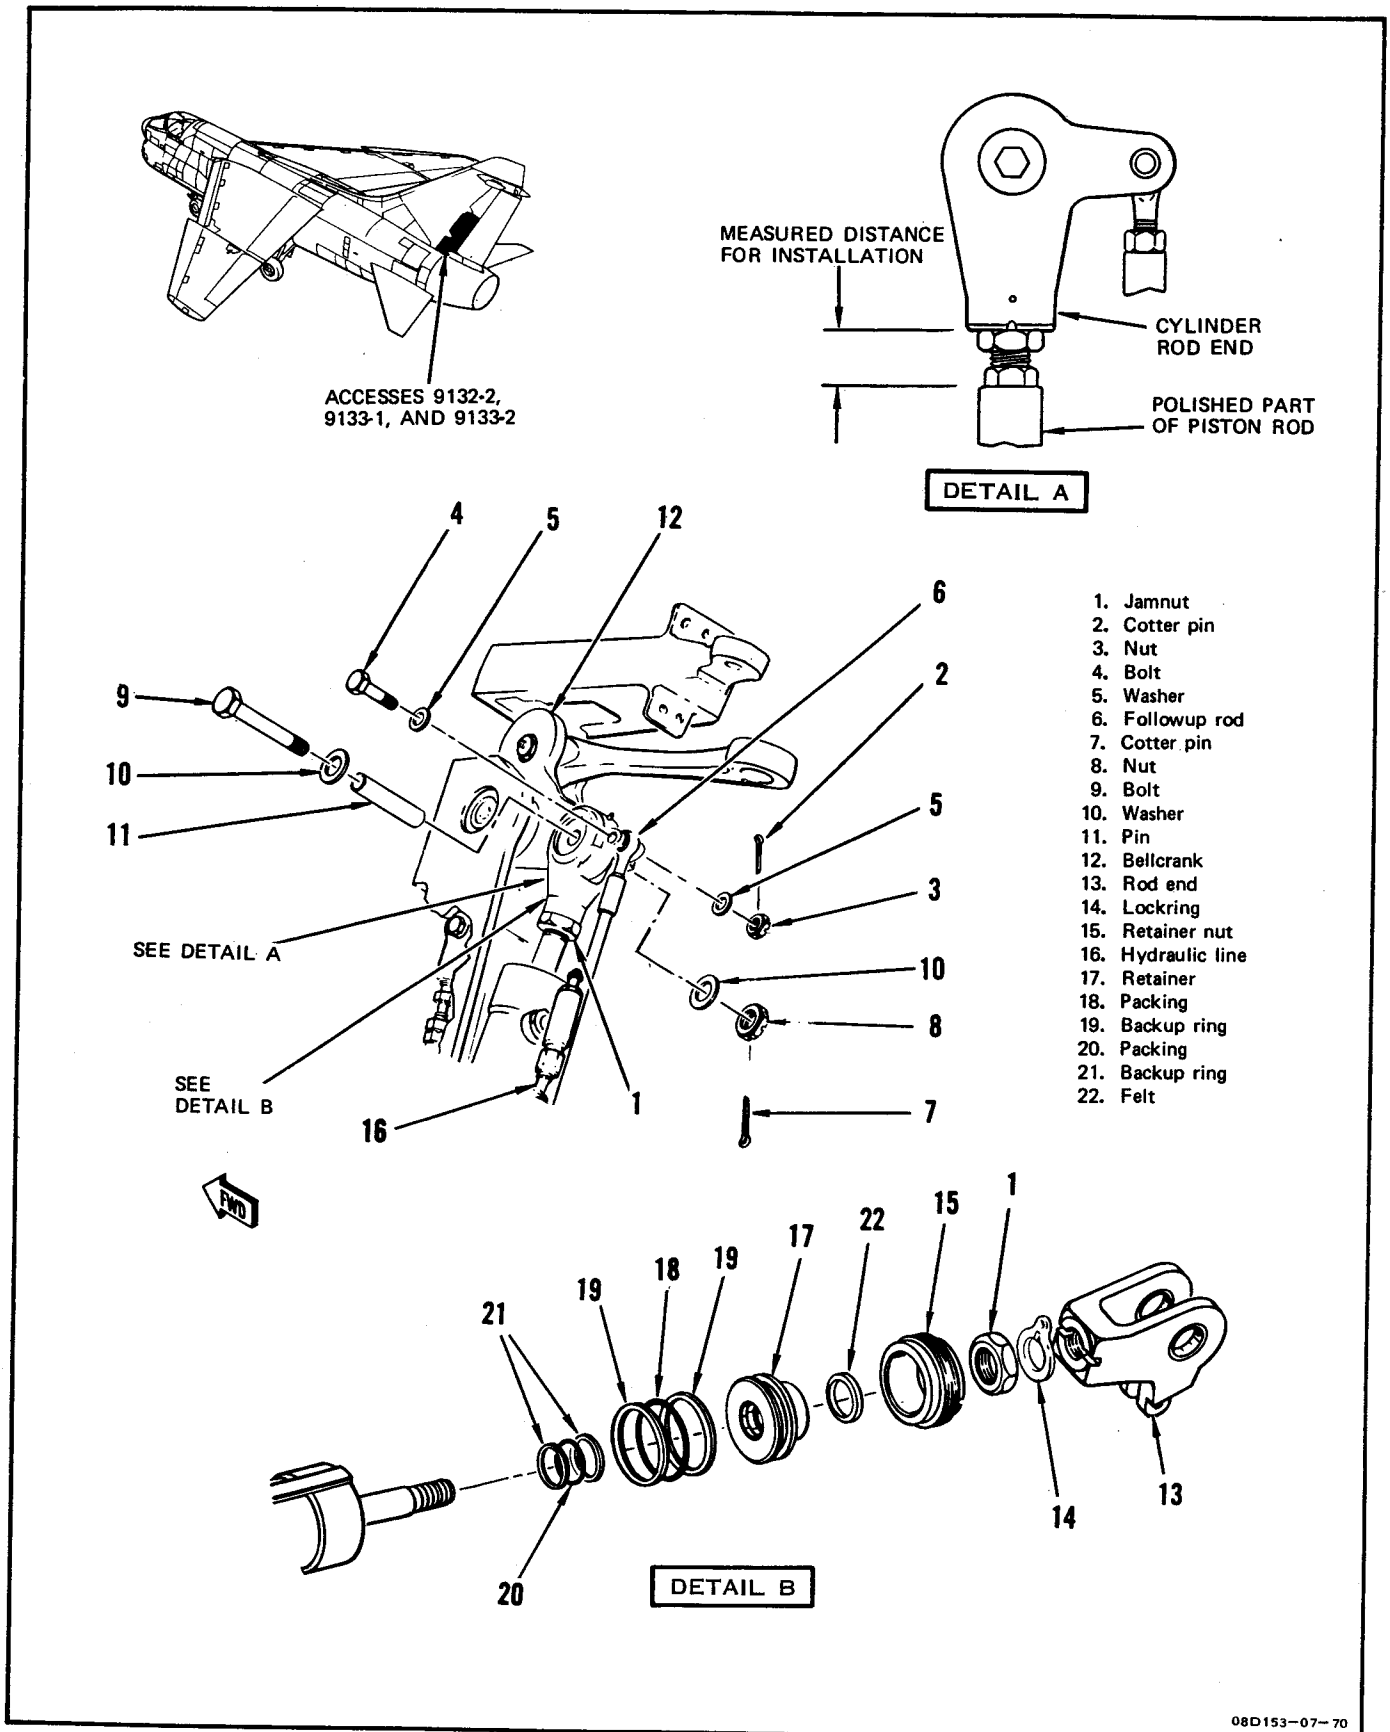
Rudder PC Cylinder Rod End Seal Replacement
